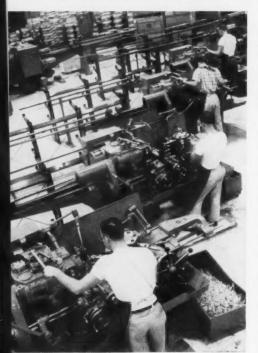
View of a portion of the machine area, showing turret lathes. The machines in this area are set up for machining quality component parts for the assembly sections.
